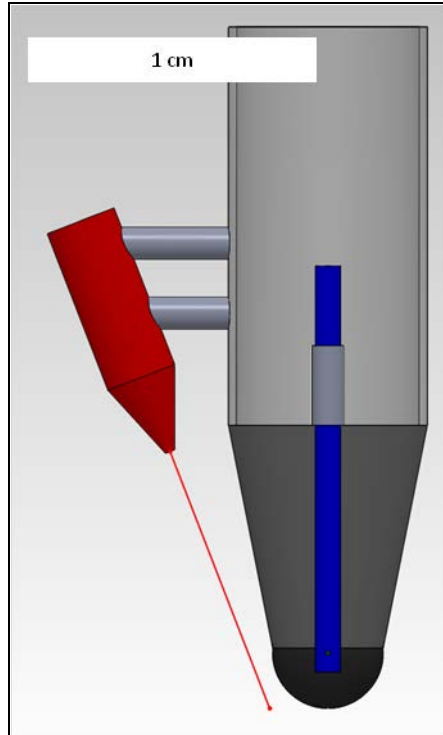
Spherical PRINT deposition head with trailing laser used for curing and/or sintering.
